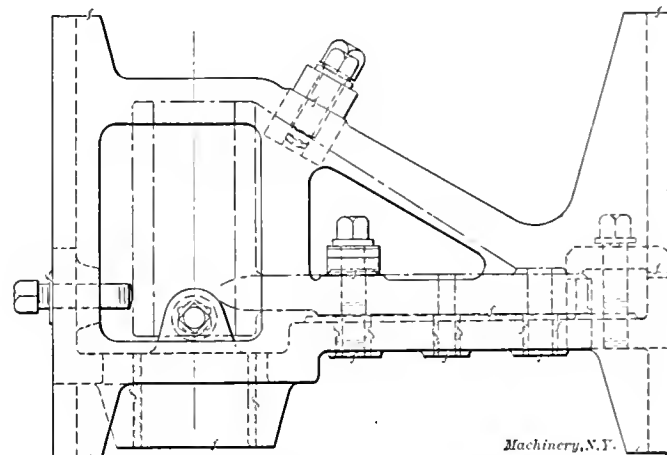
Plan and Elevation of the Jig shown in Fig. 97.
